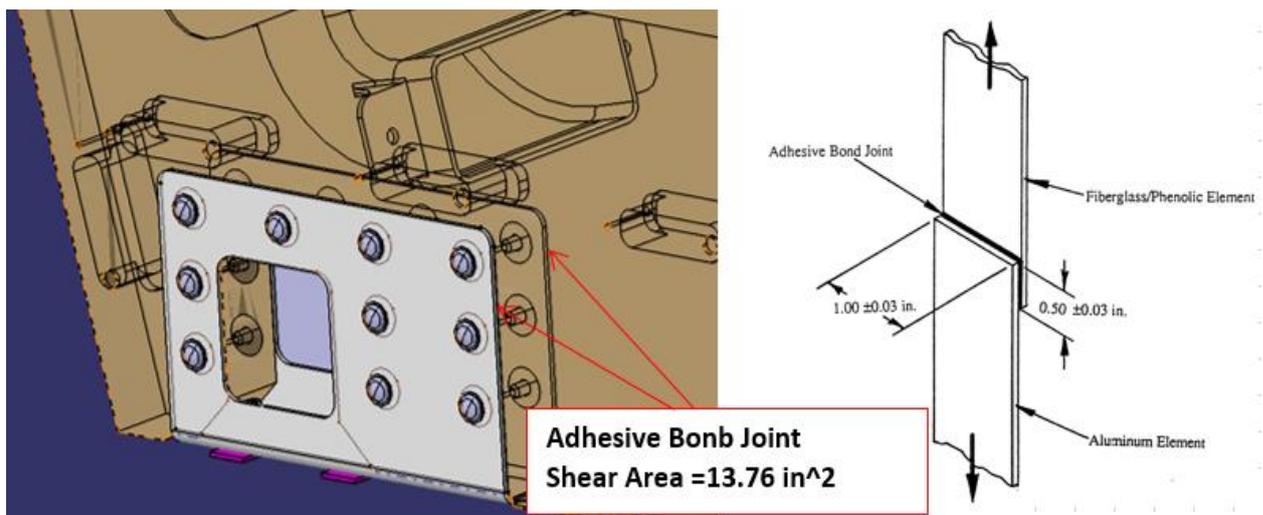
Adhesive Bond for connecting Fitting with Panel.
